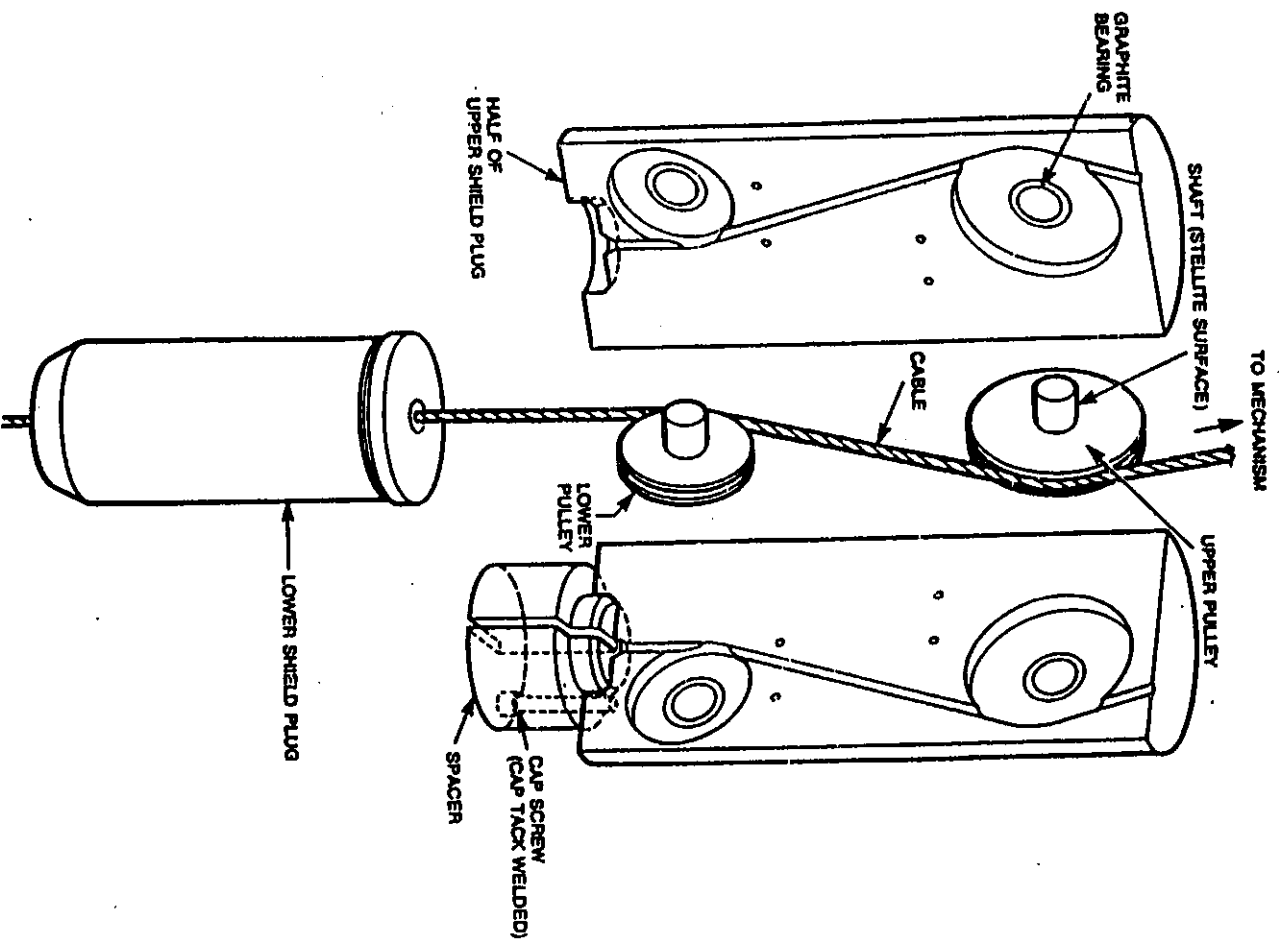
Adjuster Upper and Lower Shield Plugs
